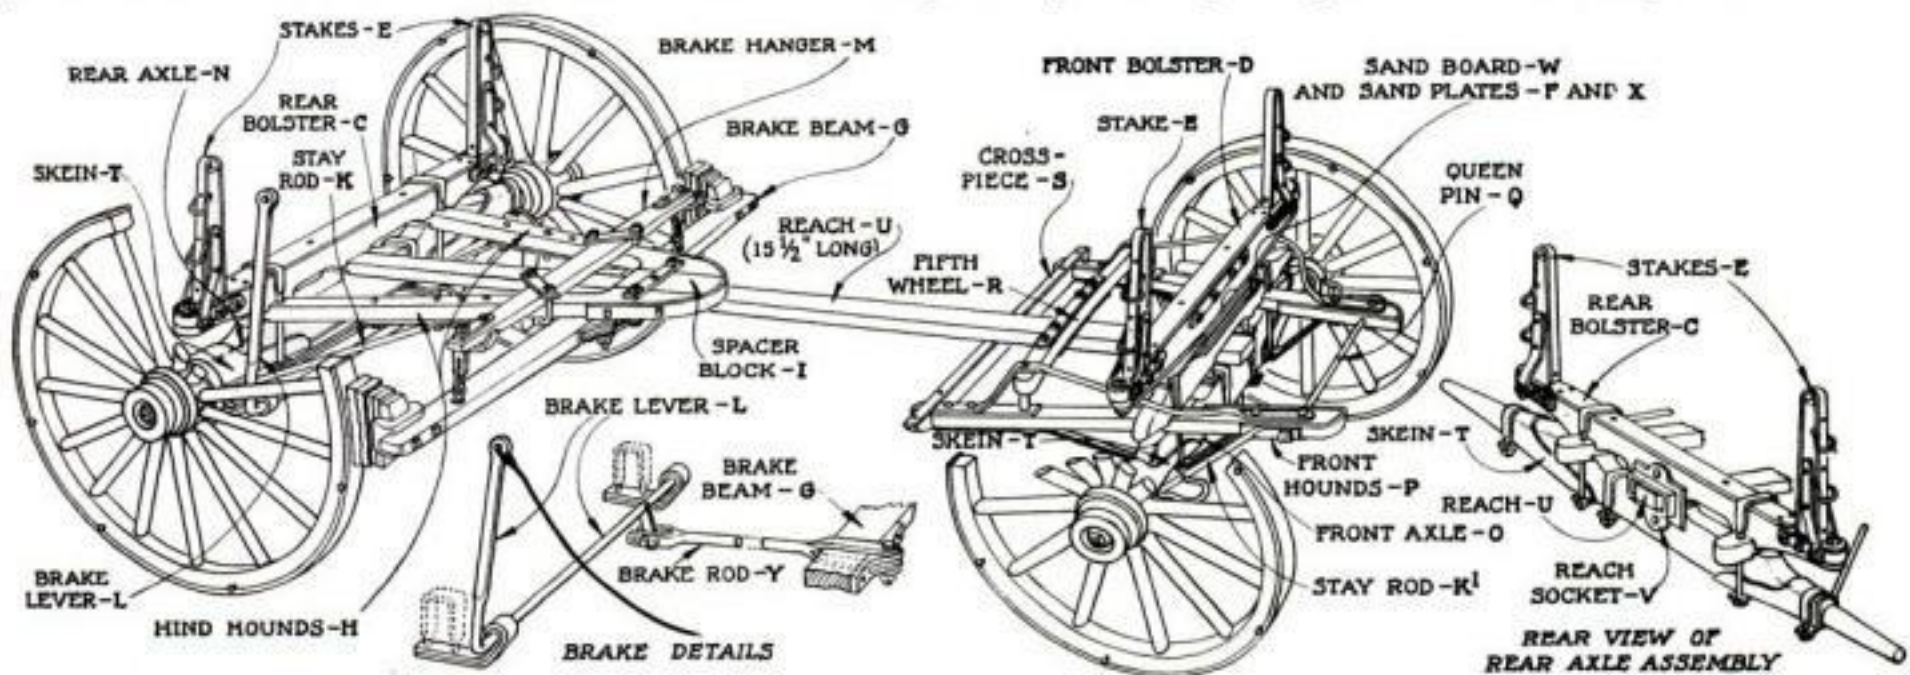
Perspective view showing the assembled carriage. Also views showing the construction of the rear axle assembly and the brake mechanism. Full size plans for construction of this model can be obtained by sending seventy-five cents for Blueprints Nos. 118, 119, and 120 (see page 110).
